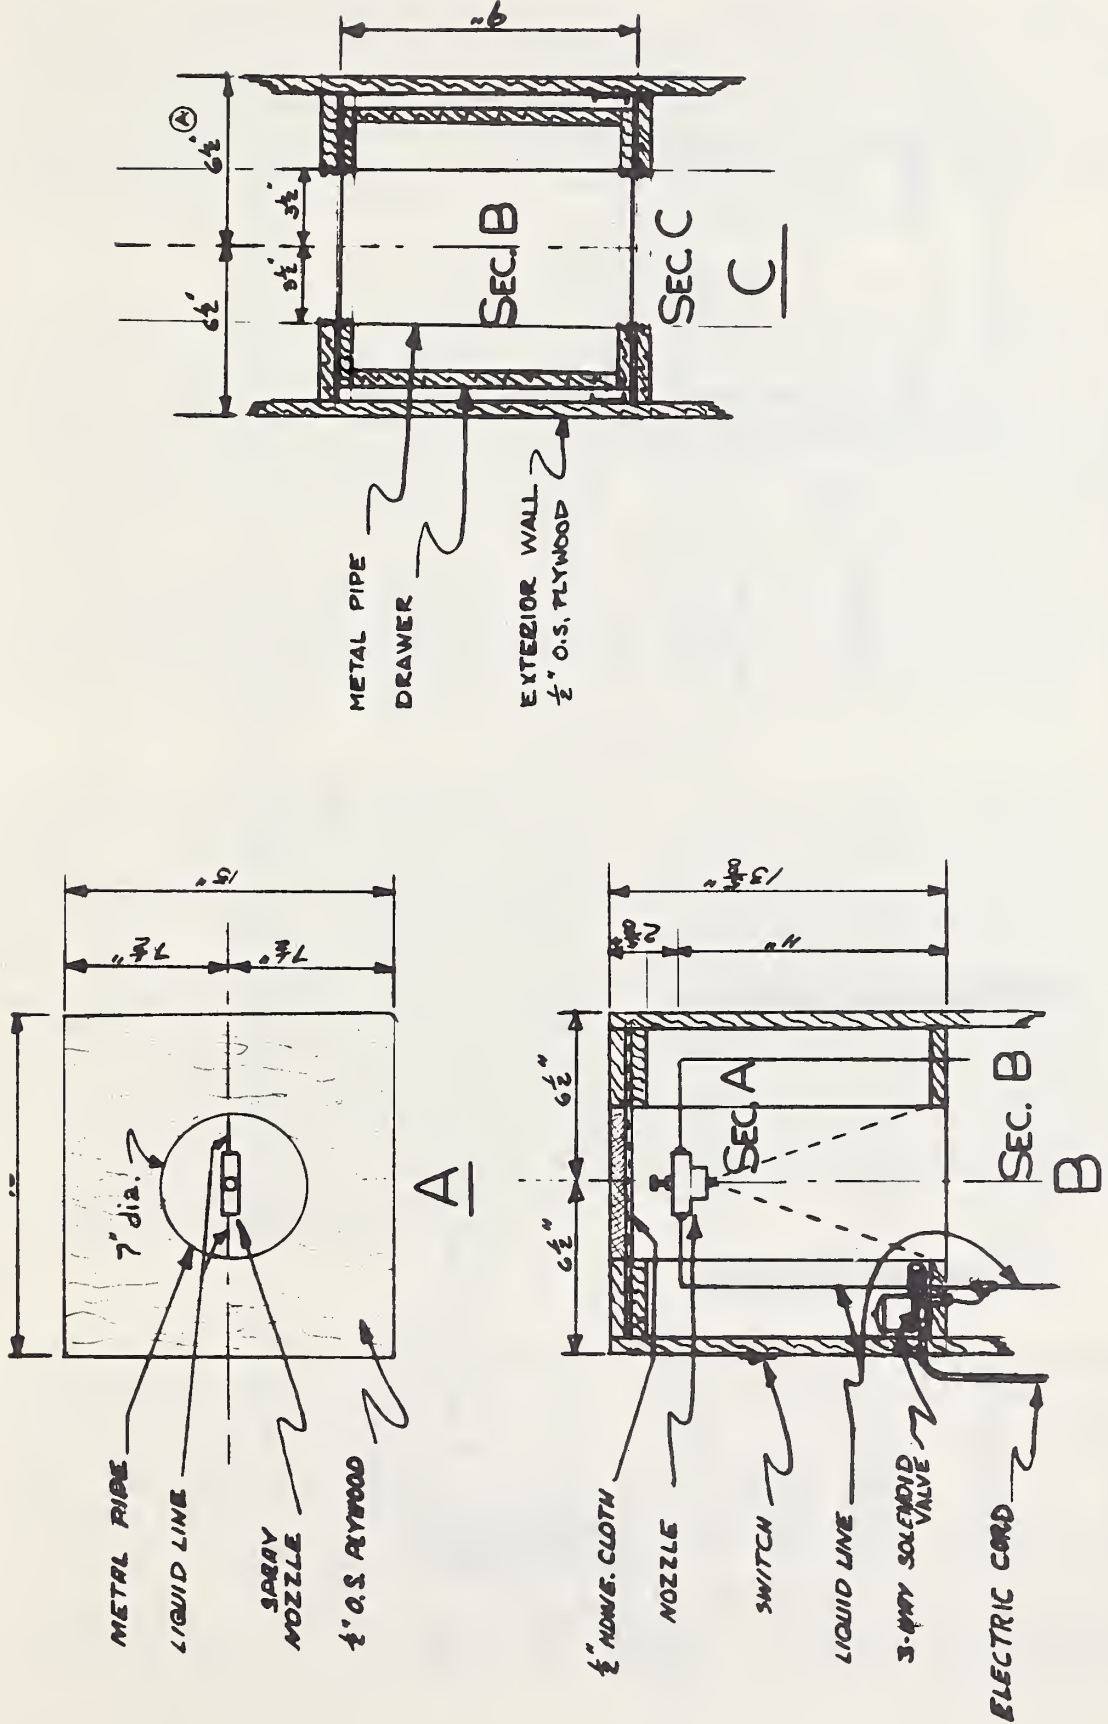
A, Top view of top section; B, cross section of top section; C, cross section of section B, showing details of drawer.
